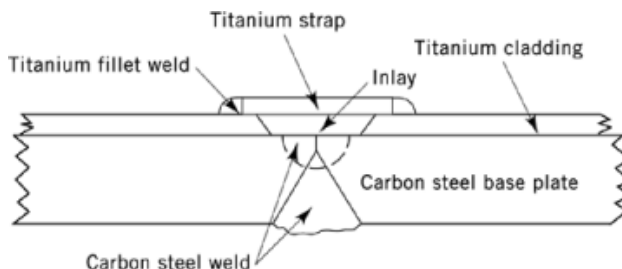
Double-v inlay, batten-strap technique for fusion welding of an explosion-clad plate containing titanium and zirconium.
